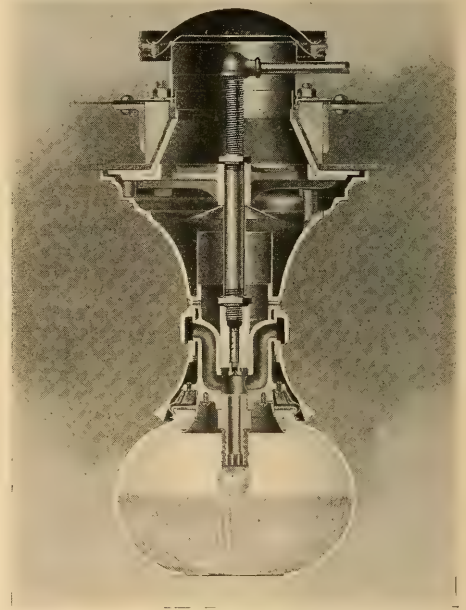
PINTSCH GAS MANTLE LAMP, SHOWING CAREFUL ARRANGEMENT OF PARTS TO OBTAIN BEST ILLUMINATION.
